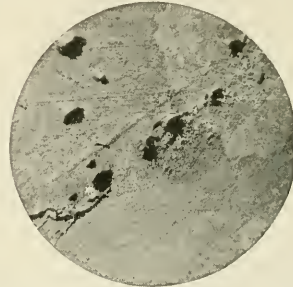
Section of One of the Welds in Fig. 1, Showing Blow Holes in Welding
